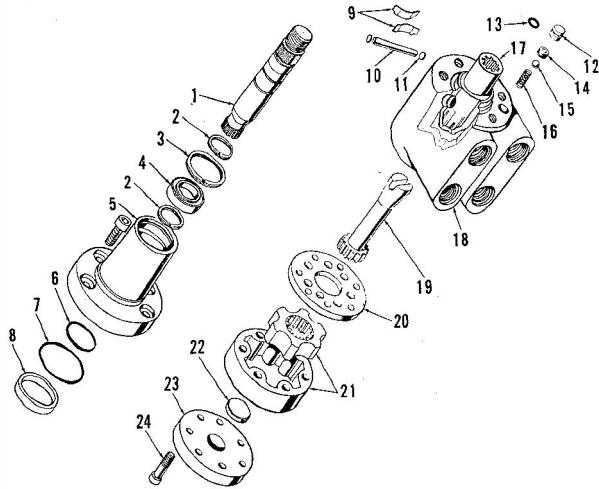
Exploded view of Char-Lynn Orbitrol hydrostatic steering hand pump used on MF235 and MF245 Orchard models.
